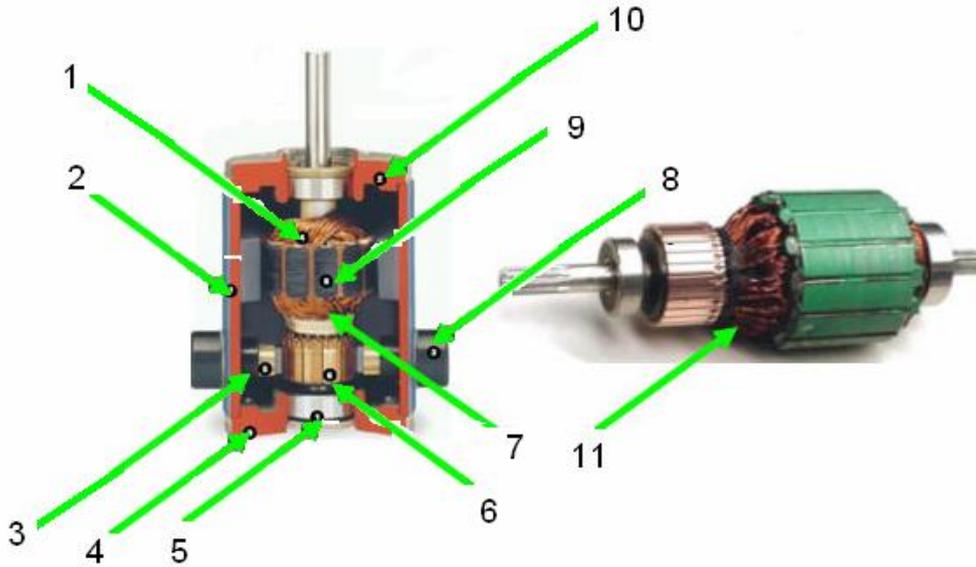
Engine components - 1. rotor; 2. permanent magnet; 3 carbon brushes; 4. bearing support; 5. bearing (ball bearing); 6. collector; 7. rotor windings; 8. brushes holder; 9. iron blades; 10. bearing support; 11. rotor
